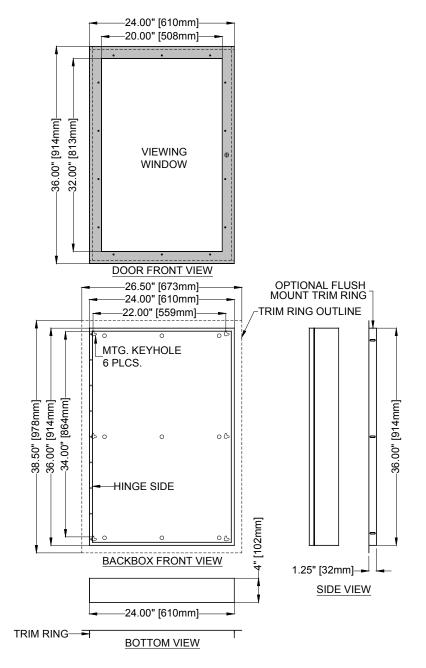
Door Assembly and Back Box Dimensions, P/N 10-2692
